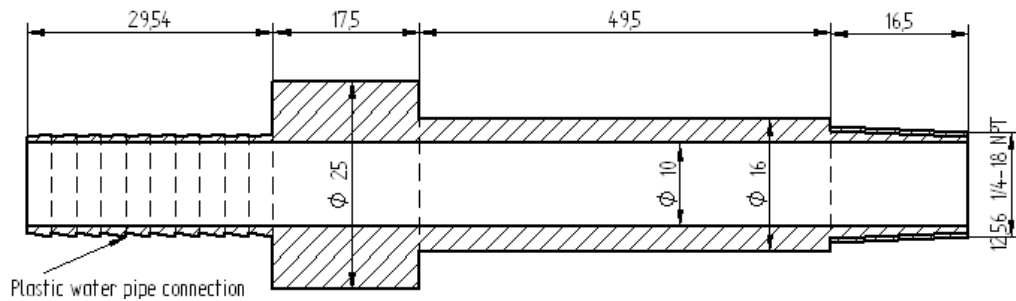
Technical Drawing of the Threaded Type of Pipe.
